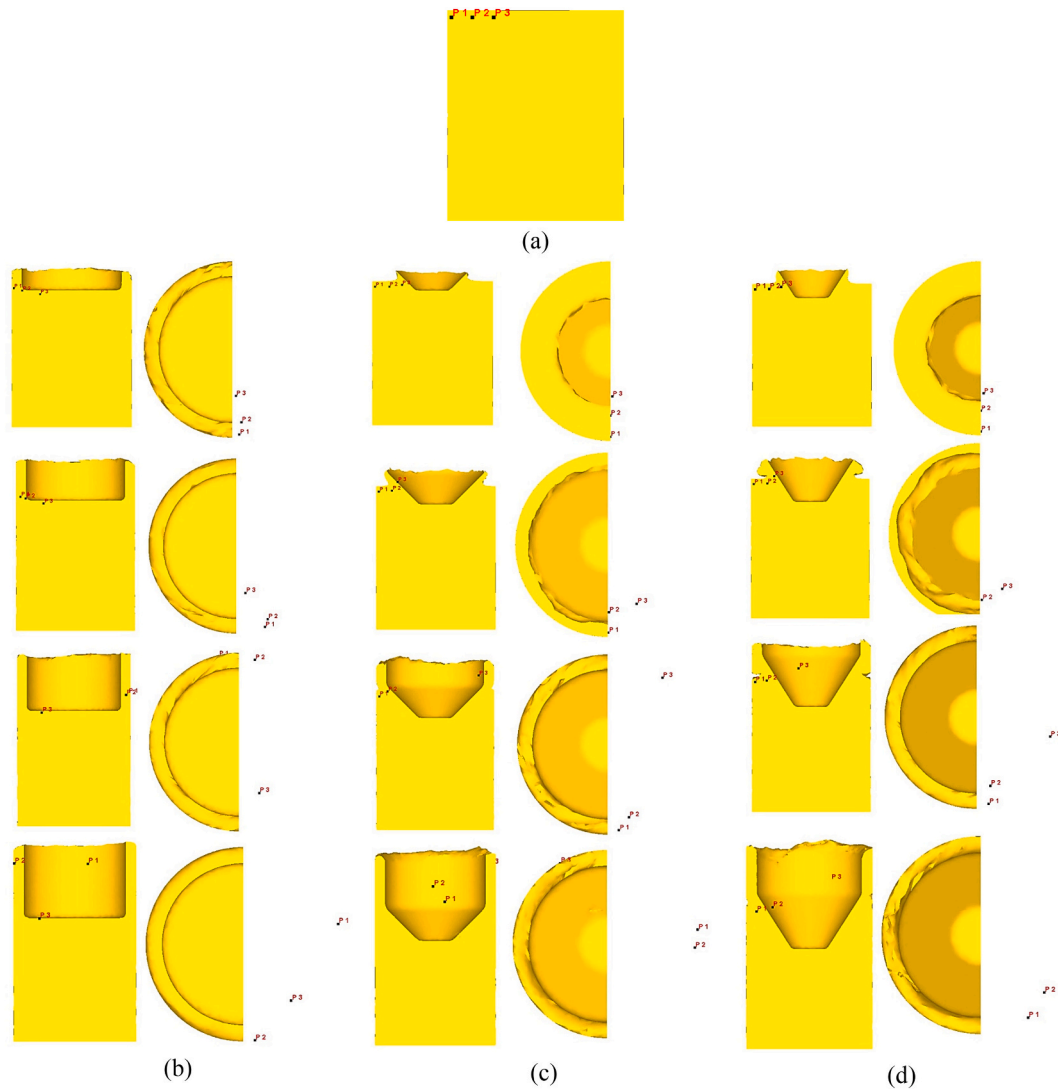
(a) Initial locations of the P1-P3 points positioned on the initial ingot, and (b)-(d) the movement sequences of points while the rotation and penetration of the FSE tool. (b) cylindrical tool, (c) taper head tool with a 60° angle, and (d) taper head tool with a 30° angle.
